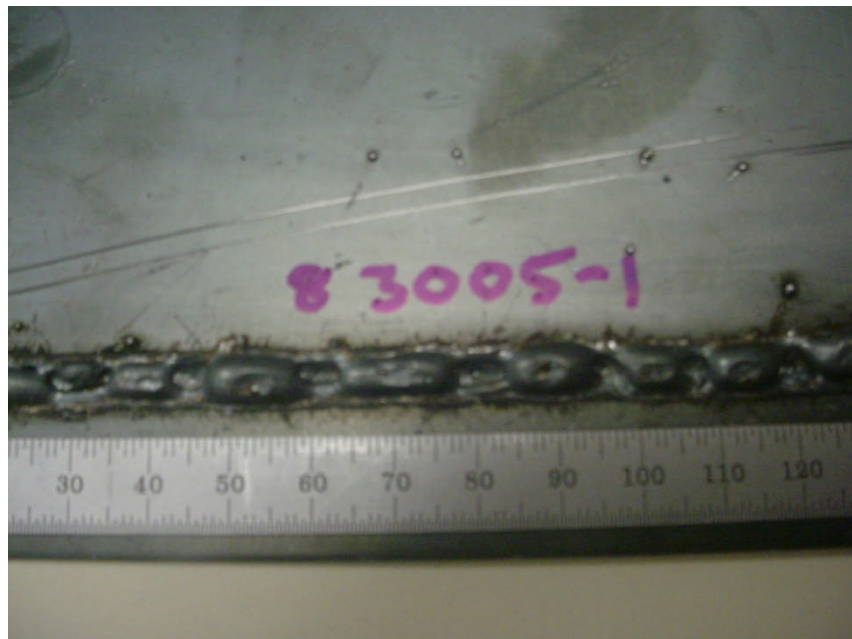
Plan View of GMAW-P Fillet Weld Discontinuous Humping in a Lap Joint, Specimen 83005-1 WFS 15.2 m/min, TS 3.0 m/min, 225 A, 34 V, 31-mm CTWD, 1.6-mm Sheet
